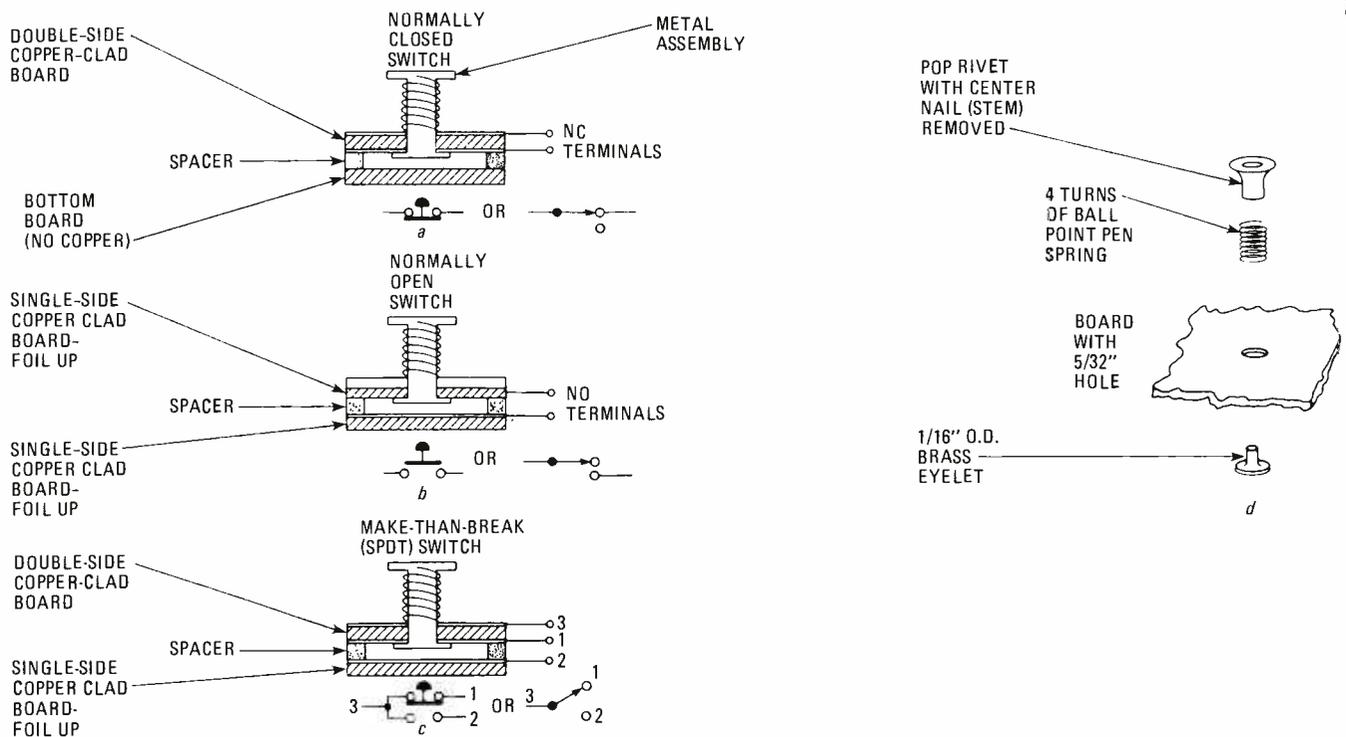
ASSEMBLY DETAILS shown here give cross-sectional view of pushbutton assemblies and copper surface locations. Spacers may be rubber or plastic material.
